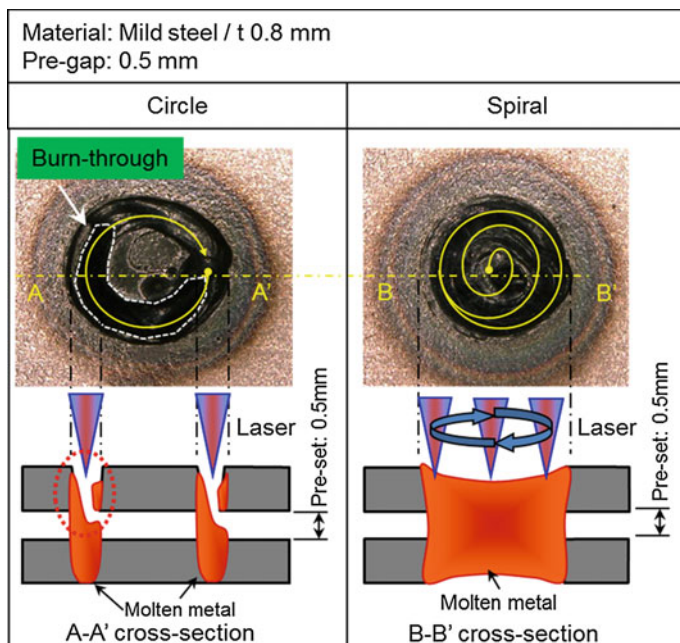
Joints by conventional circular LW and spiral scanning welding
